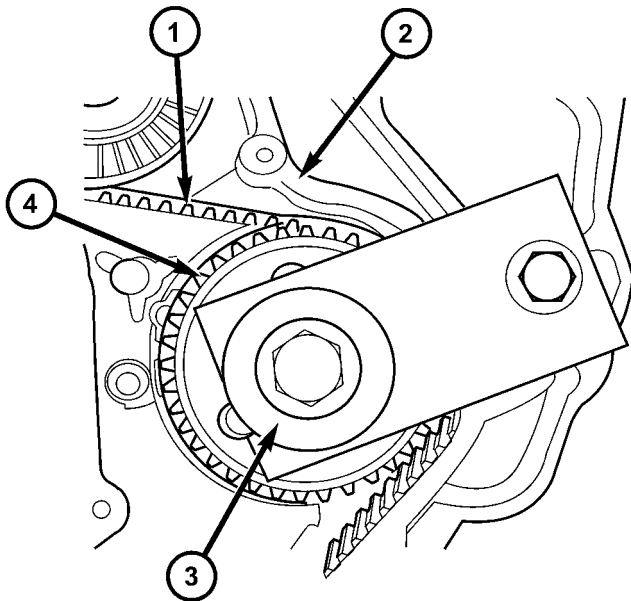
INJECTION PUMP/GEAR REMOVAL USING VM.1067
